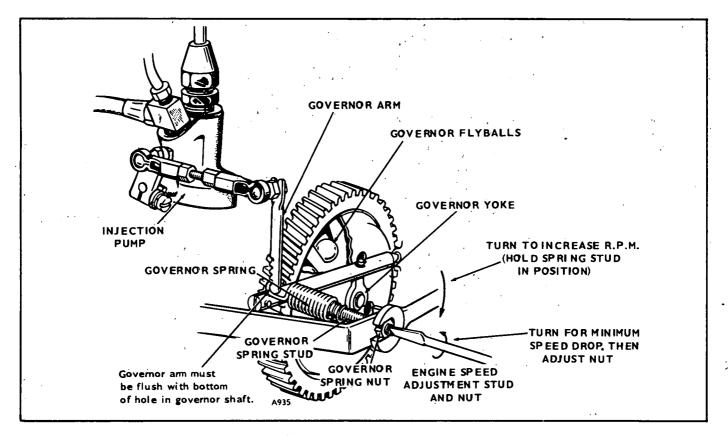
GOVERNOR ASSEMBLY (PRIOR TO SPEC R)
